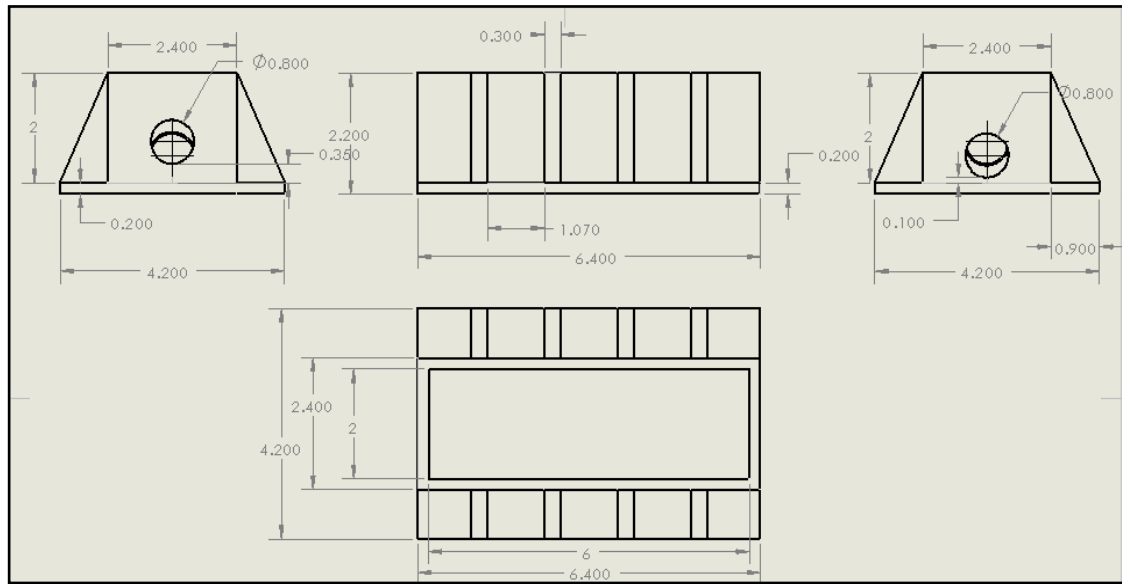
Double Tank Rectangular Design 2D view (Tank 1)
